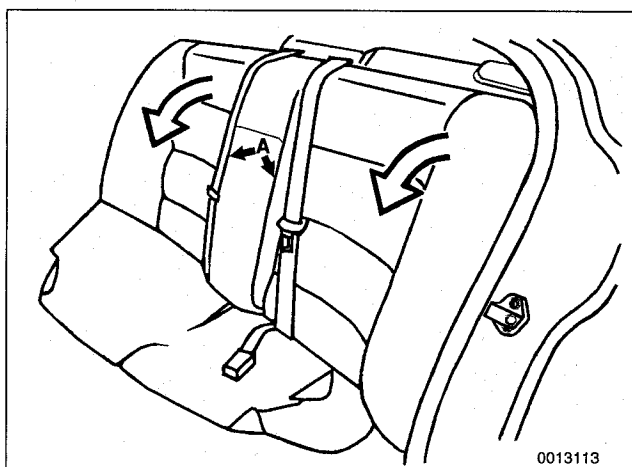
To remove rear seat, remove bottom cushion. Remove bolts (A) behind center armrest. Slide seat back up off holders, then forward.
